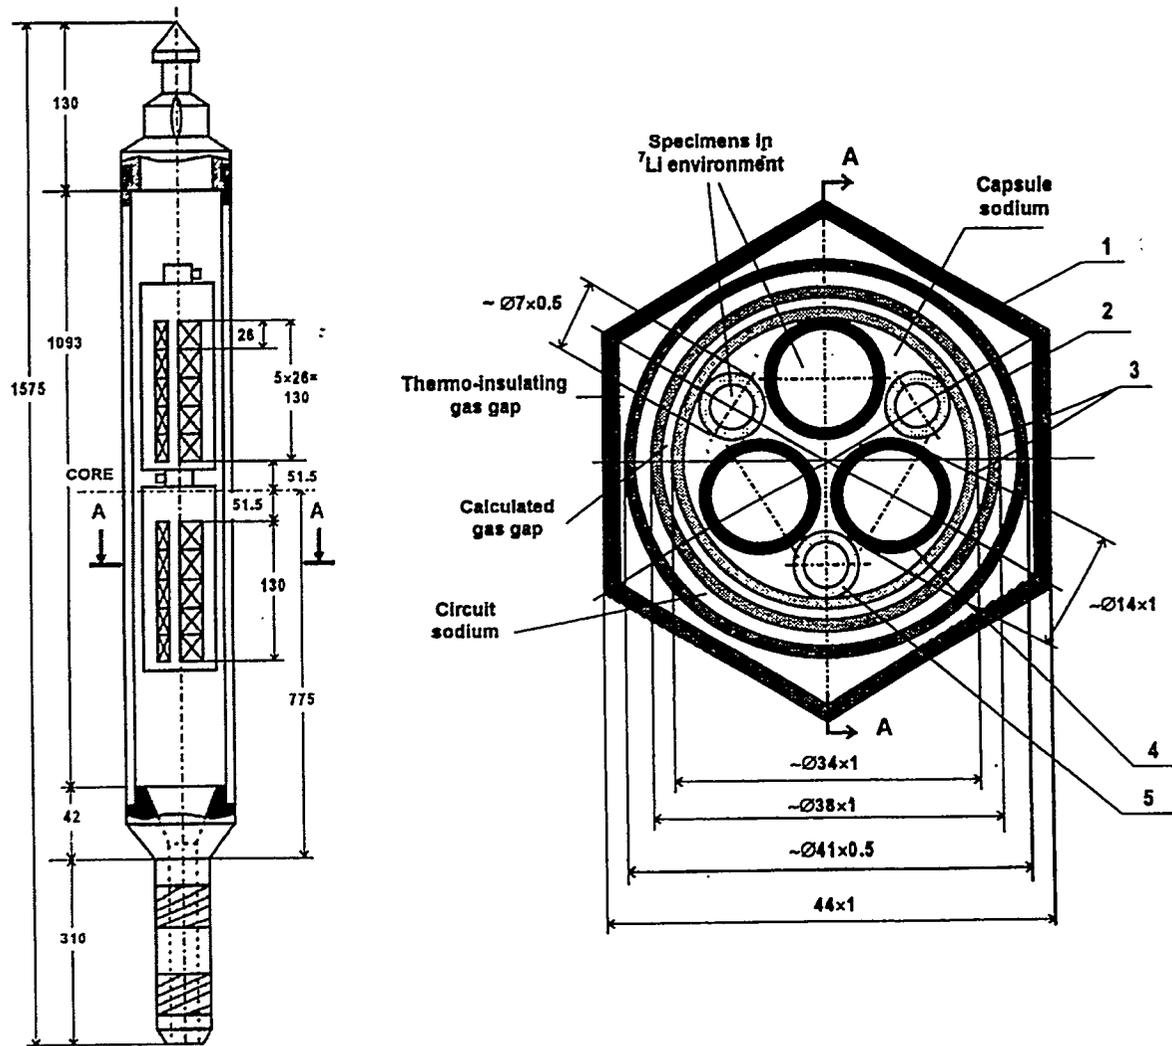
Two-temperature Fusion-2 capsule assembly (left) and cross-section of the capsule (right).
